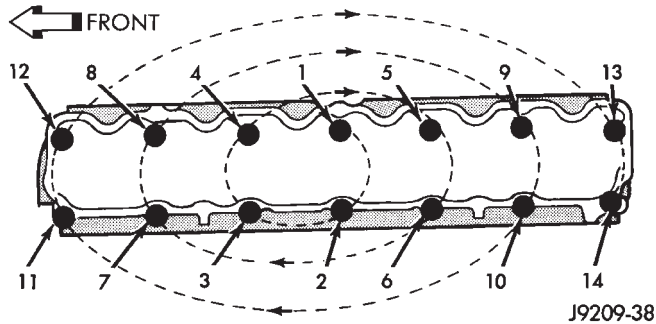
Engine Cylinder Head Bolt Tightening Sequence
